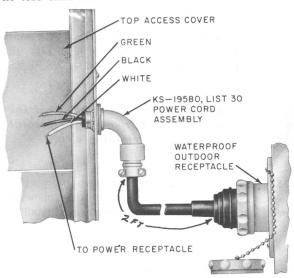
KS-19580, List 30 Power Cord Assembly Overhead Entrance
